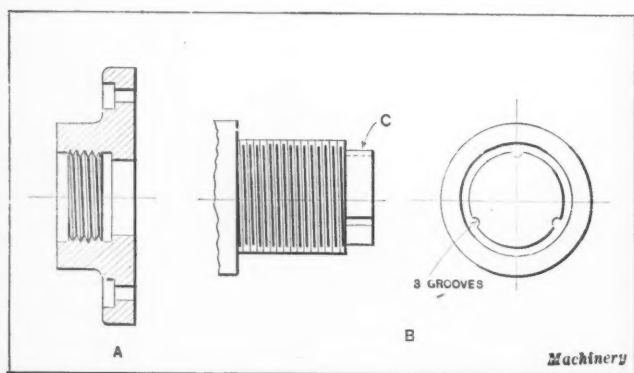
(A) Type of Adapter used in Connection with Chucks; (B) Lathe Spindle Pilot provided with Dust Grooves
